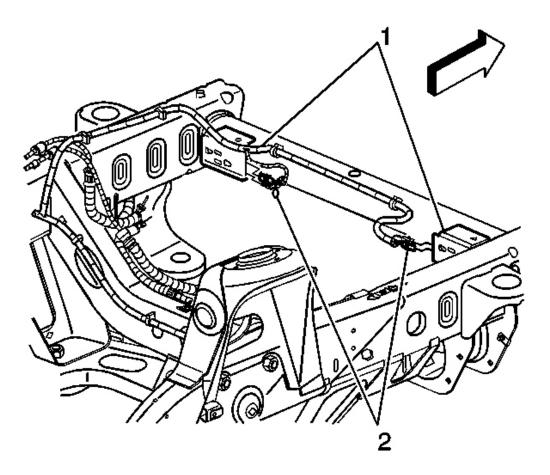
Locating Sensor Assembly Courtesy of GENERAL MOTORS CORP.
